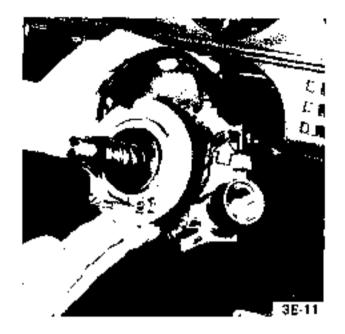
E-11 Removing Upper Part of Signal Switch Housing Cover
